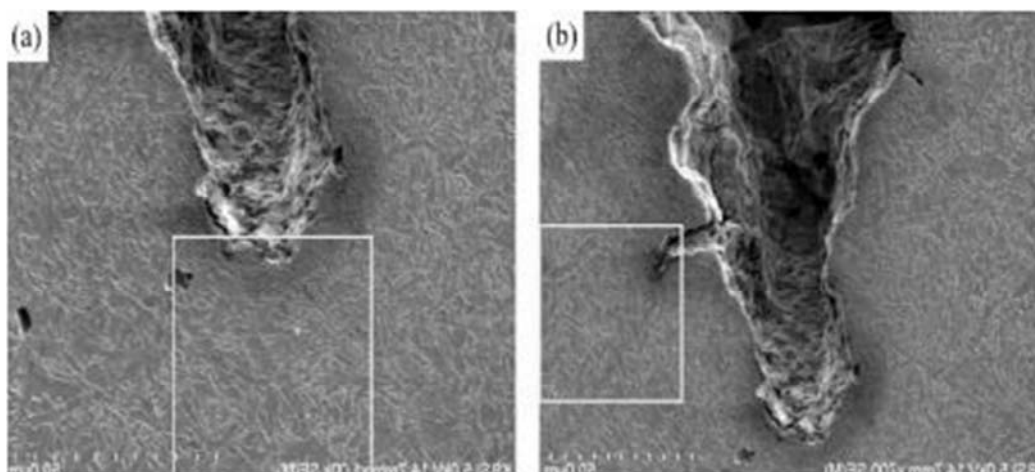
Location of SIMS analysis for the hot crack produced by welding consumable A and low current (220 A): (a) the end of hot crack and (b) the side of hot crack
